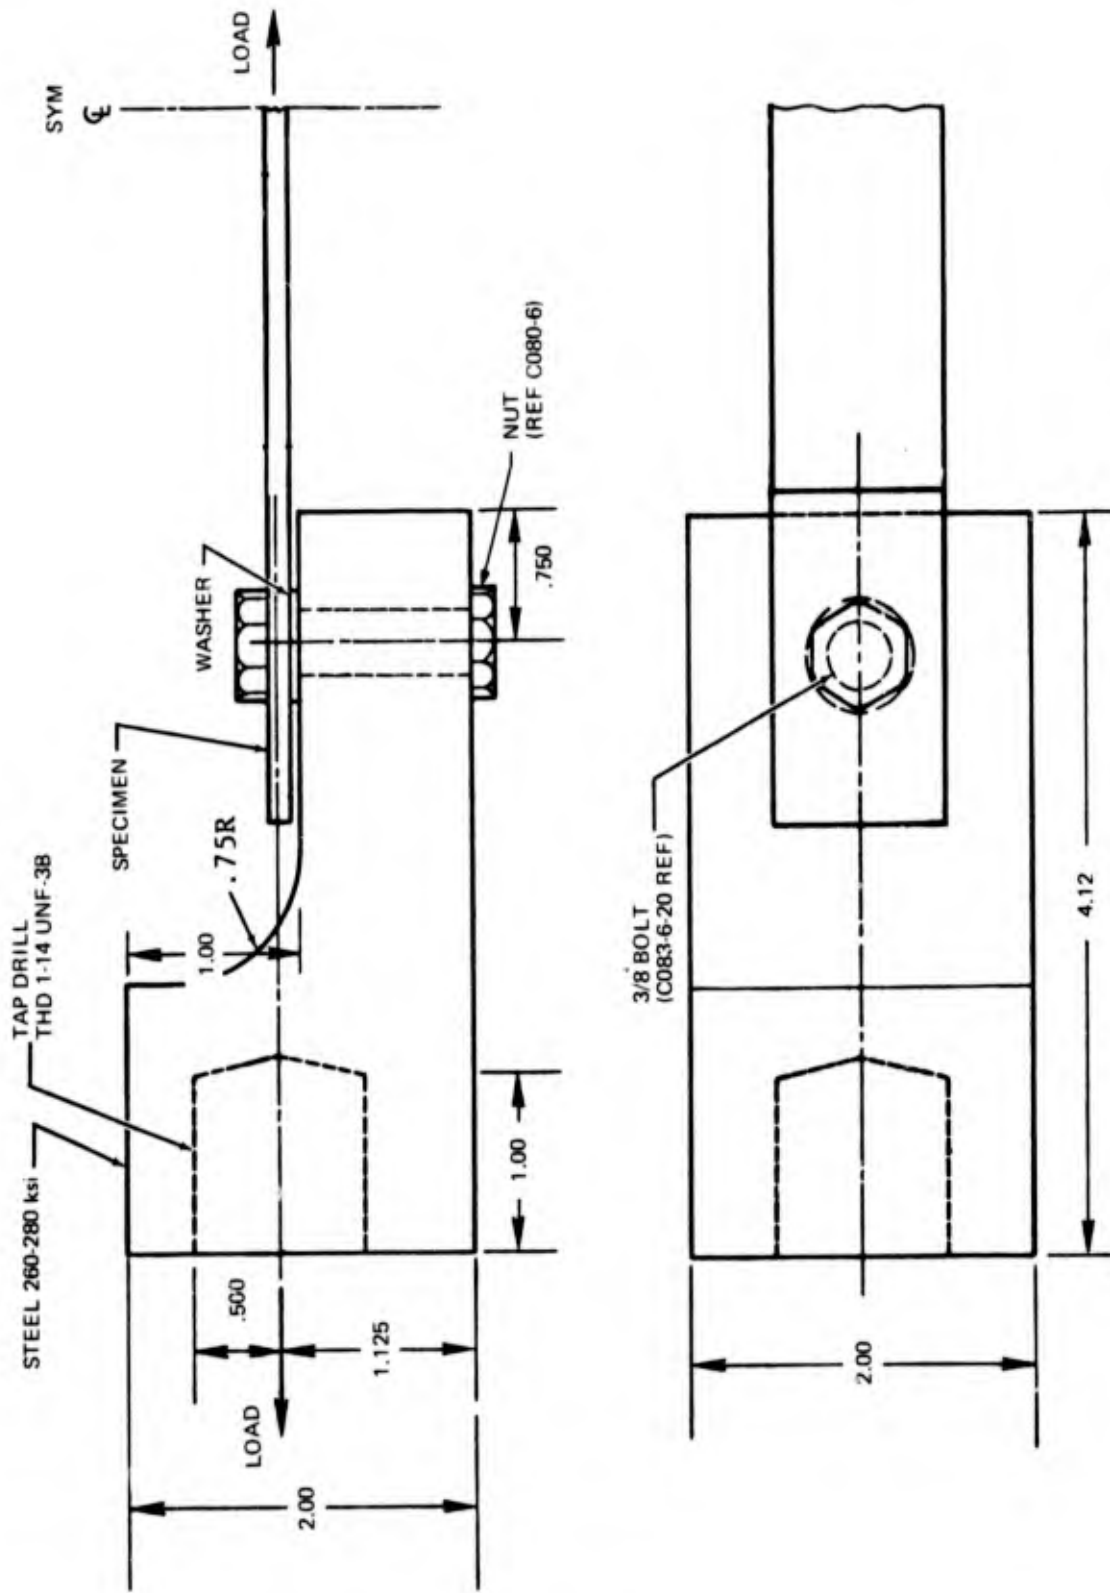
Single Shear Test Fixture - Bolted Joint Specimen
